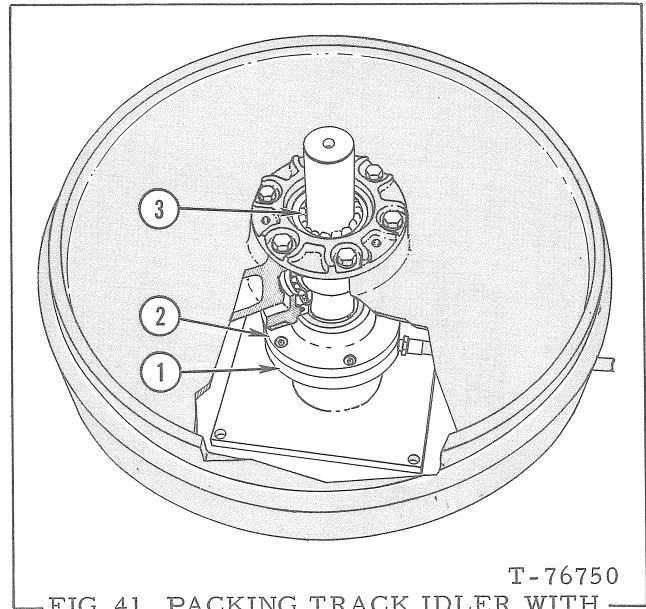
PACKING TRACK IDLER WITH GREASE USING GREASING FIXTURE
